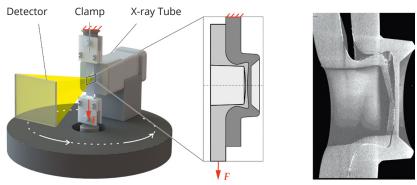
In-situ test setup (left) and reconstructed 3D image of an aluminum clinch joint under shear loading (right).
